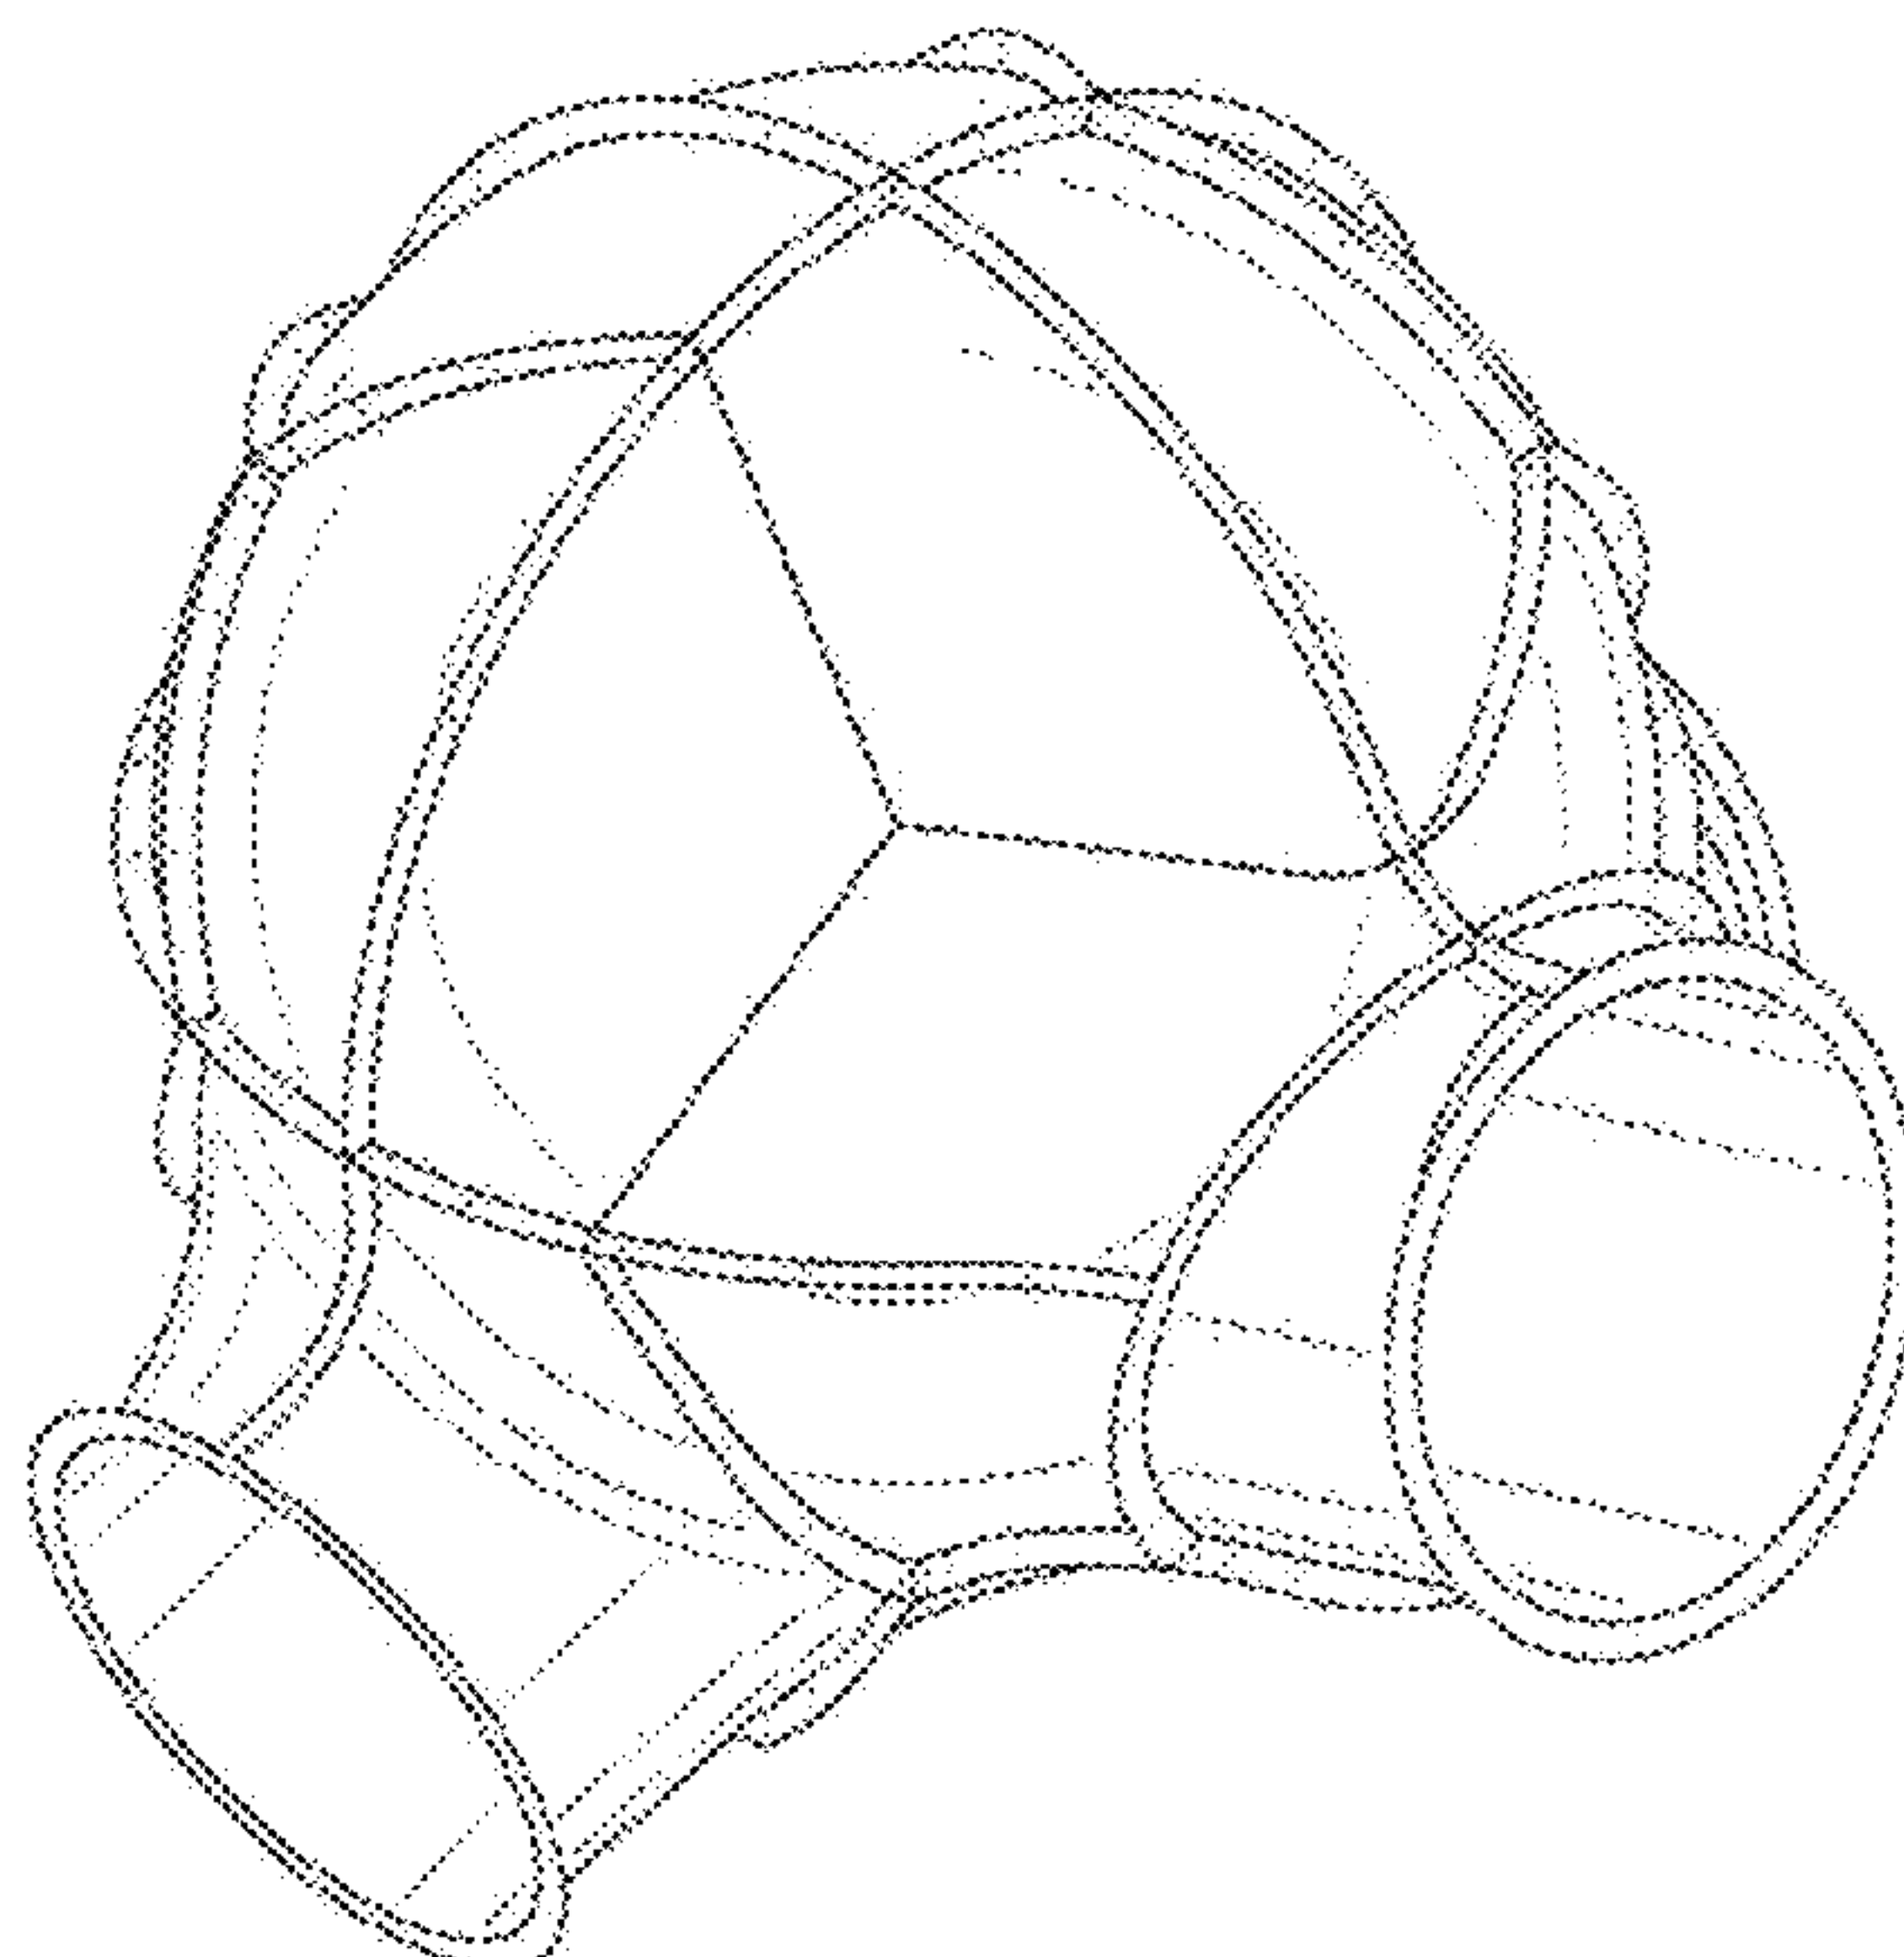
is a front side view of the spherical ride element of FIG. 1;
